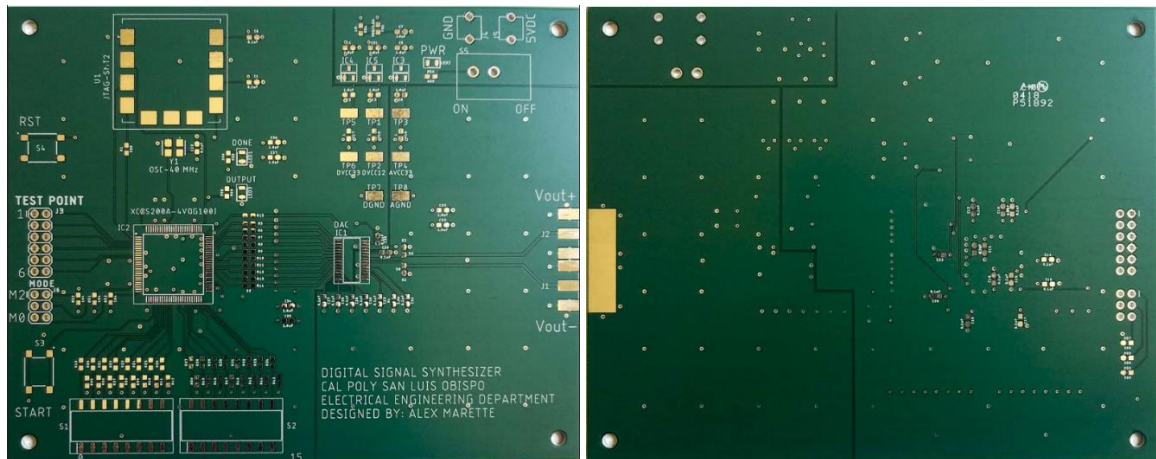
Bare Digital Synthesizer PCB Board Top (left) & Bottom (right)
